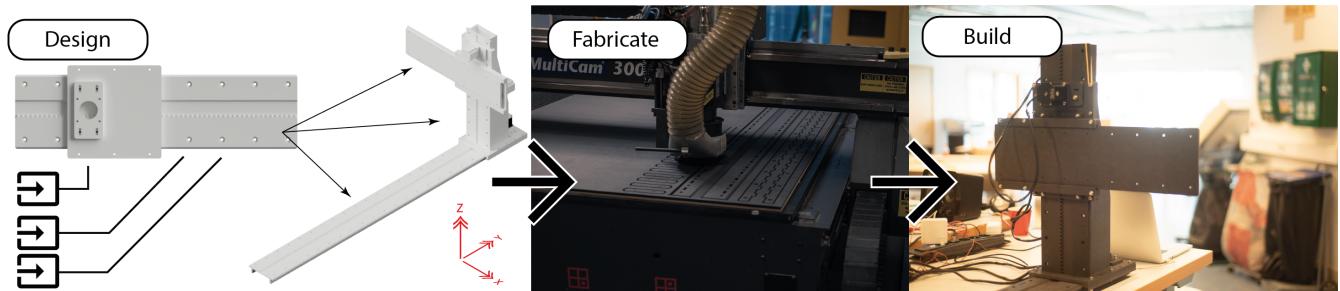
This is Fabricatable Machines. A toolkit that lets users design, fabricate and build custom digital fabrication machines. We implemented a linear actuator, The Fabricatable Axis, that is both parametrically sized and optimized to be manufactured using a CNC milling machine. Users can prototype and explore combinations of linear motion virtually using the parametric CAD model, before fabricating and assembling their design.
